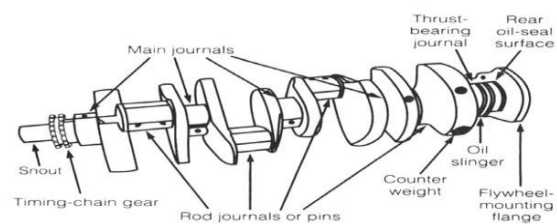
typical crankshaft with main journals that support the crankshaft in the engine block. Rod journals are offset from the crankshaft centerline.
